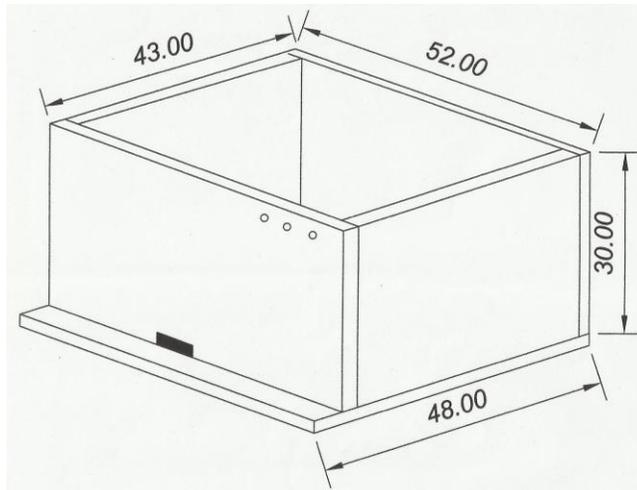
Tanzania top bar hive with flight entrance on the floor and wall (All dimensions are in centimeters).
